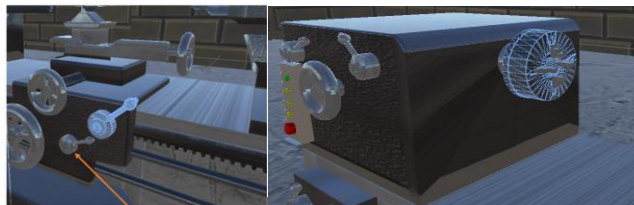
Lever for Chuck Rotation; Chuck, Speed Selector, On and Off Buttons
